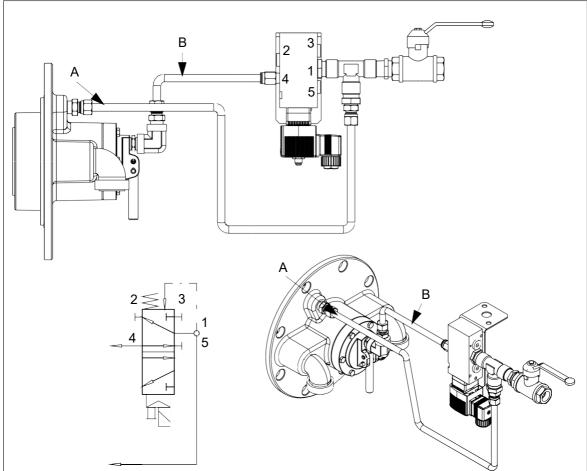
Pneumatic connection of a 5/2-way valve - ISO-metric view
